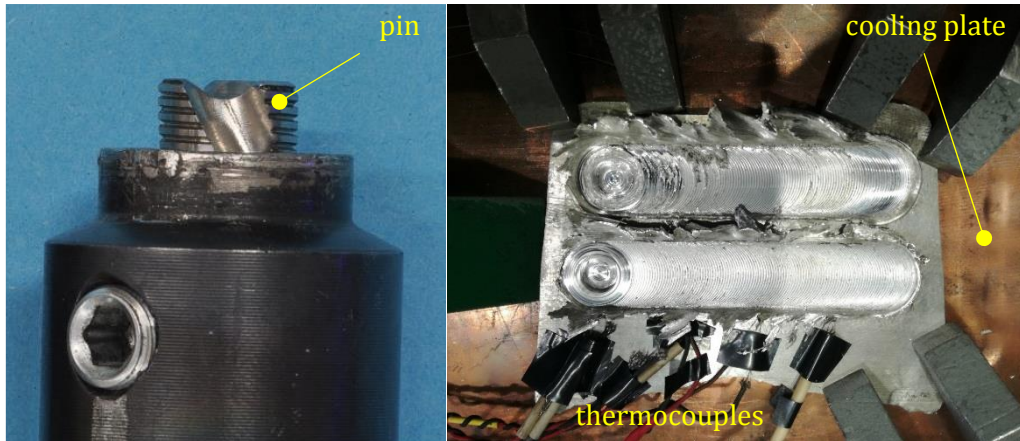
Left: FSP tool, pin length 5 mm [52]. Right: clamped AM50 sample on the cooling plate.
